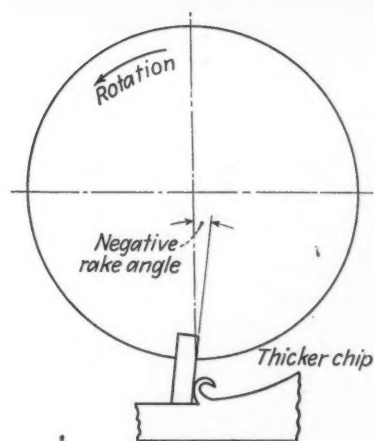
In carbide milling, a heavy chip is a decided advantage, since, as shown here, it places the cutting pressure further away from the critical cutting edge.
